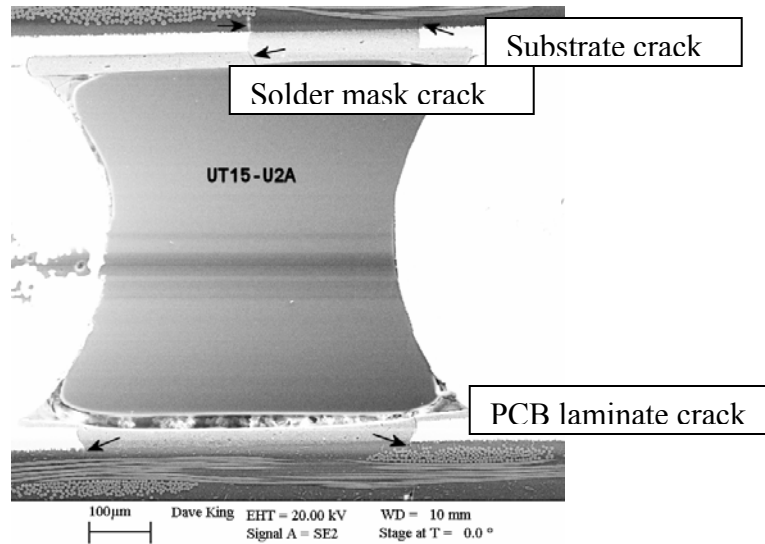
Substrate cracks and test board cracks in aged SnAg joint pads (UT15-U2A-SA-AG-15)
